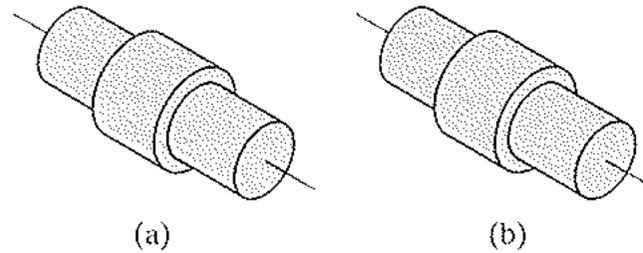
Two parts of identical shape and size but different manufacturing requirements: (a) 1,000,000 pc/yr, tolerance = ± 0.010 in., material = 1015 CR steel, nickel plate; and (b) 100 pc/yr, tolerance = ± 0.001 in., material = 18-8 stainless steel.
